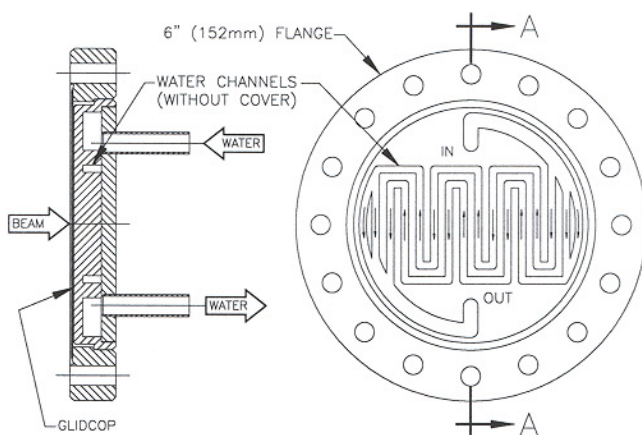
A Glidcop beam dump with a pattern of machined channels.
